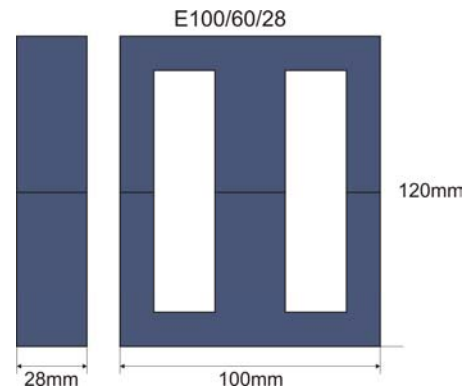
Dimensions for the used ferrite core EE100/60/28 (2 pieces)
